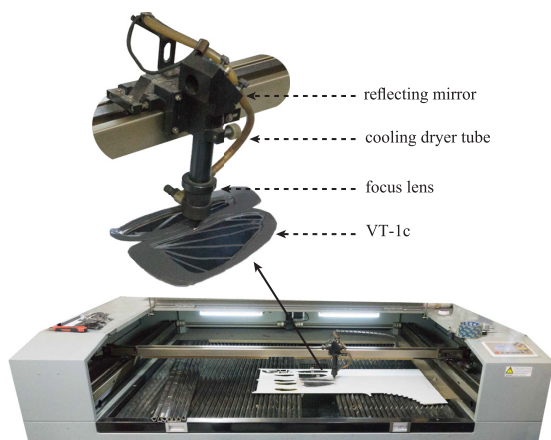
CO₂ laser CNC cutting machine trimming the locust-inspired thermoformed PVC body, wings, and venation patterns producing CAD and CASD prototypes (VT-1c and VT-1gd).
